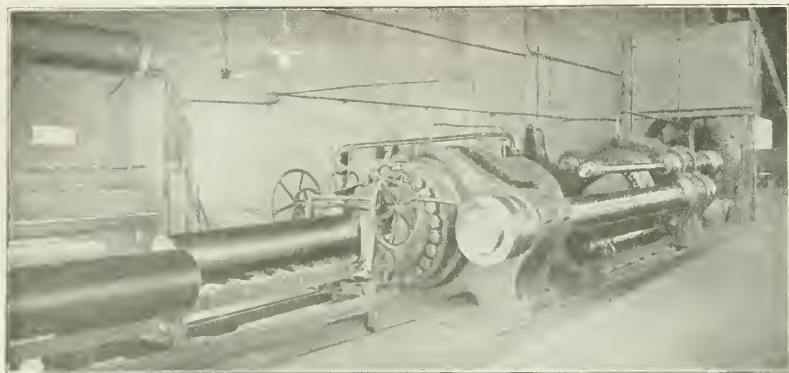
HORIZONTAL EXTRUSION PRESS
